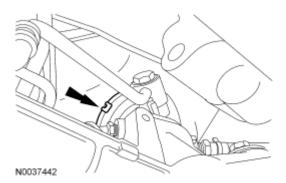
Locating Steering Gear-To-Dash Seal Clips Courtesy of FORD MOTOR CO.
